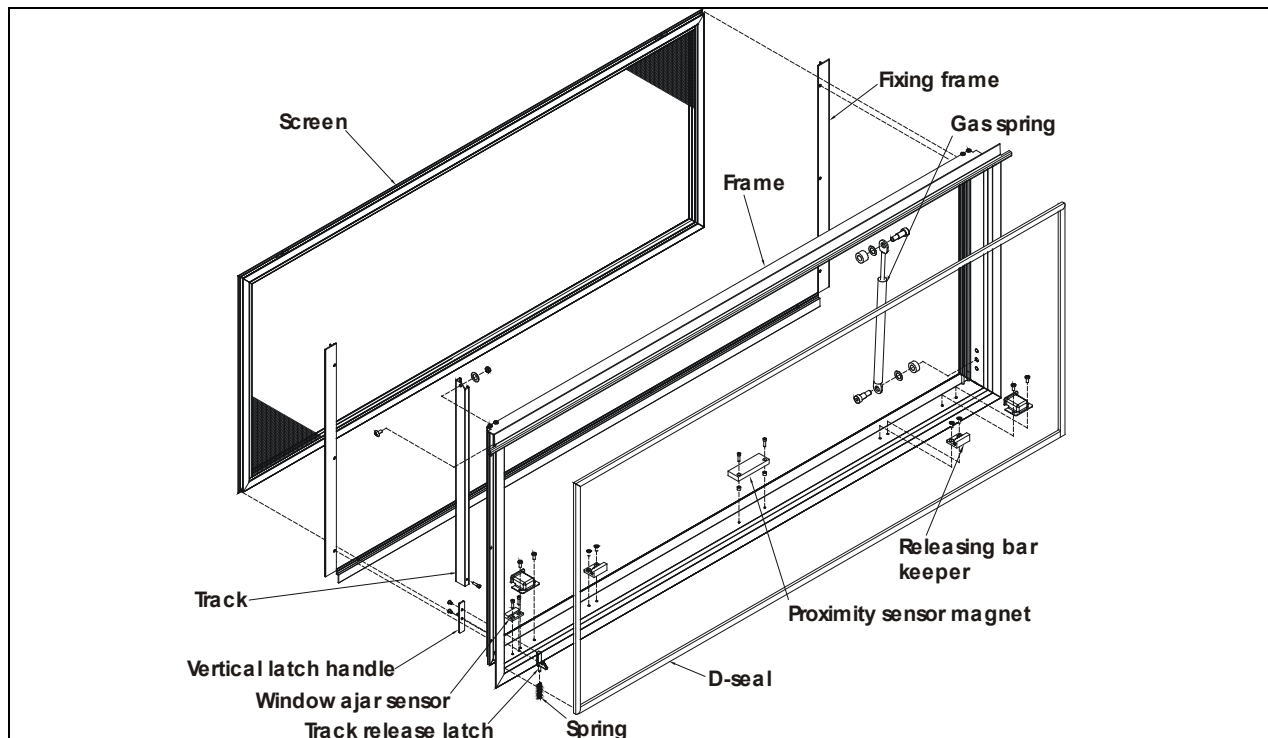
ELECTRIC AWNING WINDOW EXPLODED VIEW (FRAME) 18586
